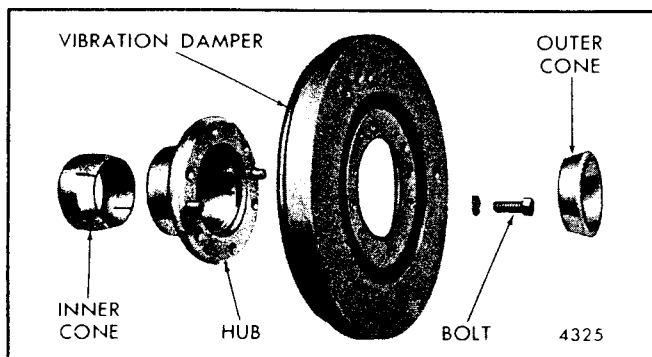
Vibration Damper Details and Relative Location of Parts
